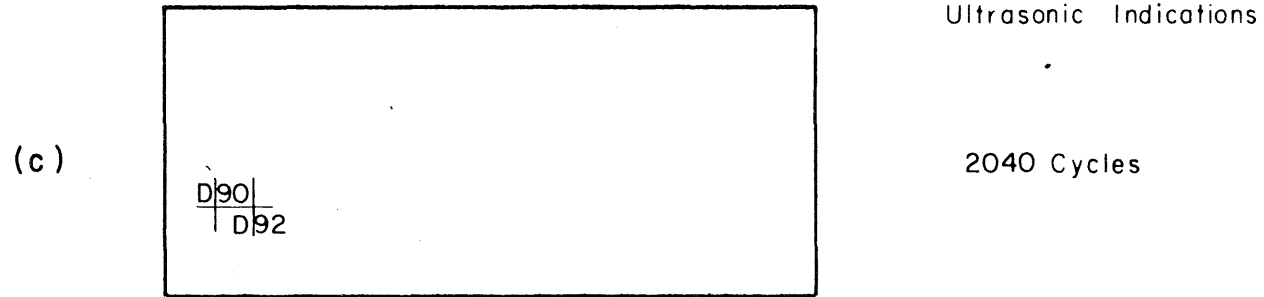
(cont.) FRACTURE SURFACE, AND ULTRASONIC INDICATIONS RECORDED FOR SPECIMEN ND-45
